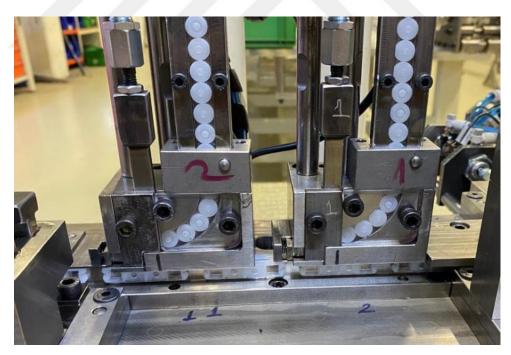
1st and 2nd Ø9 mm Roller Assembly Units
